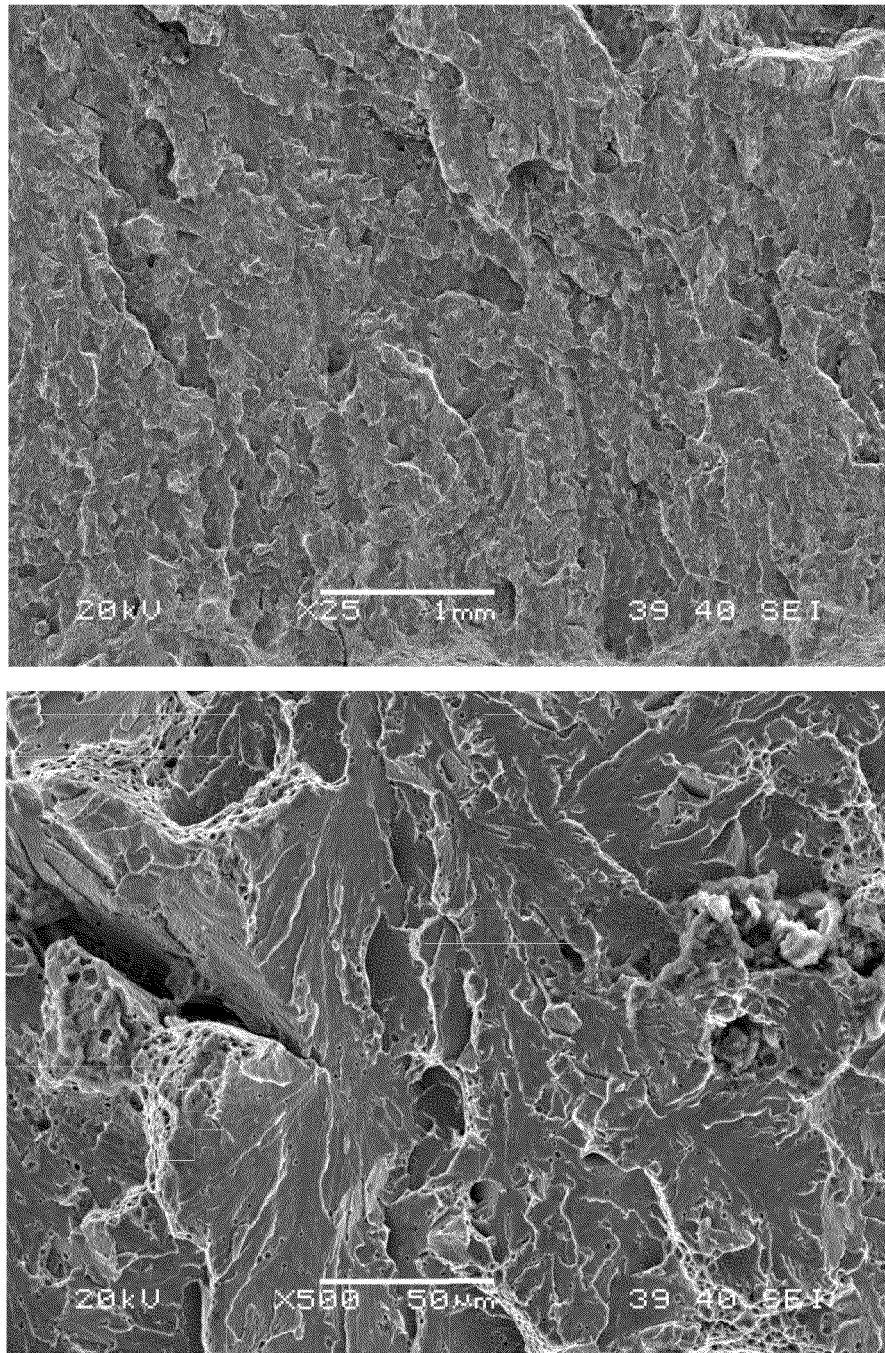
SEM images of the ID weld fracture surface that show cleavage fracture morphology.
